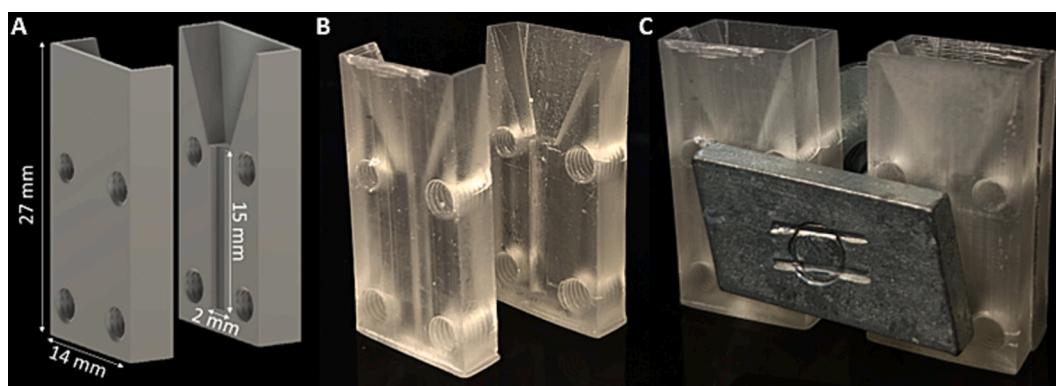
(A) CAD design of the intravitreal implant mould with the desired dimensions. (B) Gross view of a 3D-printed mould with a funnel shape to facilitate powder loading. (C) View of the moulds assembled with a pressure screw system.
